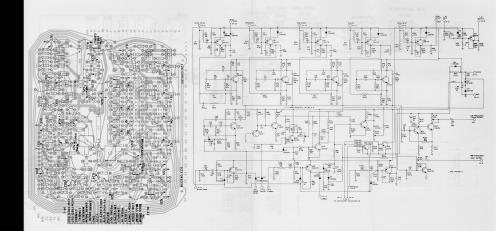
RHYTHM III VOICING BOARD 124-000180, LAYOUT & SCHEMATIC
